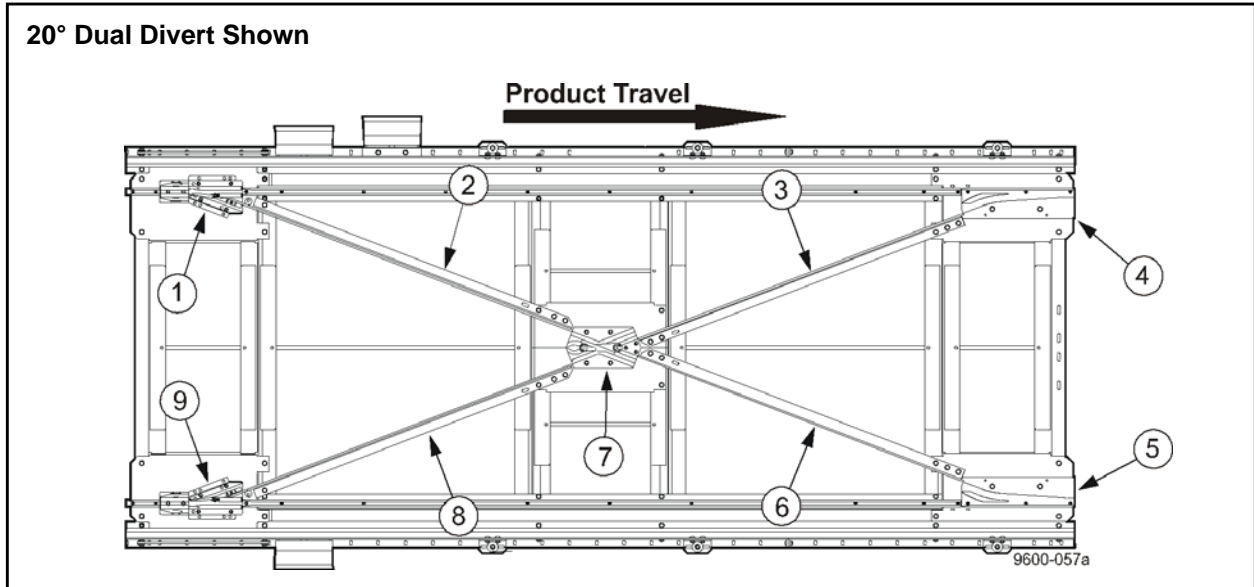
12 Intermediate Section - 20° and 30° Dual Divert - Drawing
